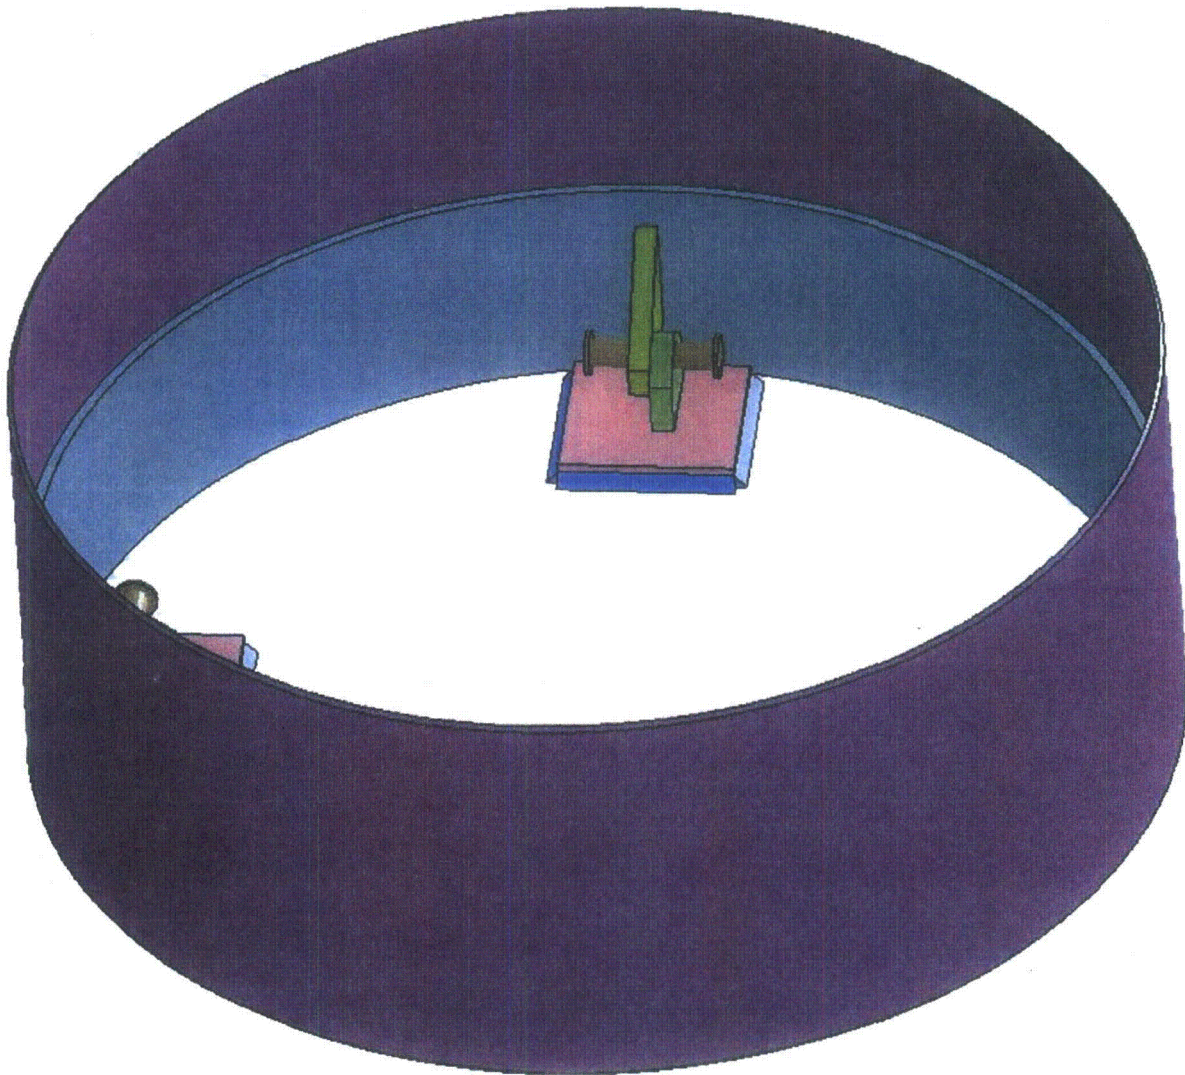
Impact Limiter Inner Shell, Lifting Ring, Attachment Lugs, Mounting Plates, Welds and Attachment Pins; Unmeshed
